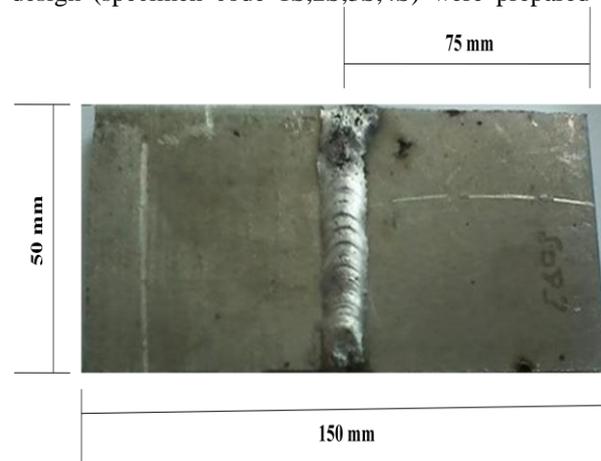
Pictorial View of Single V Butt Joint Welded Specimen
